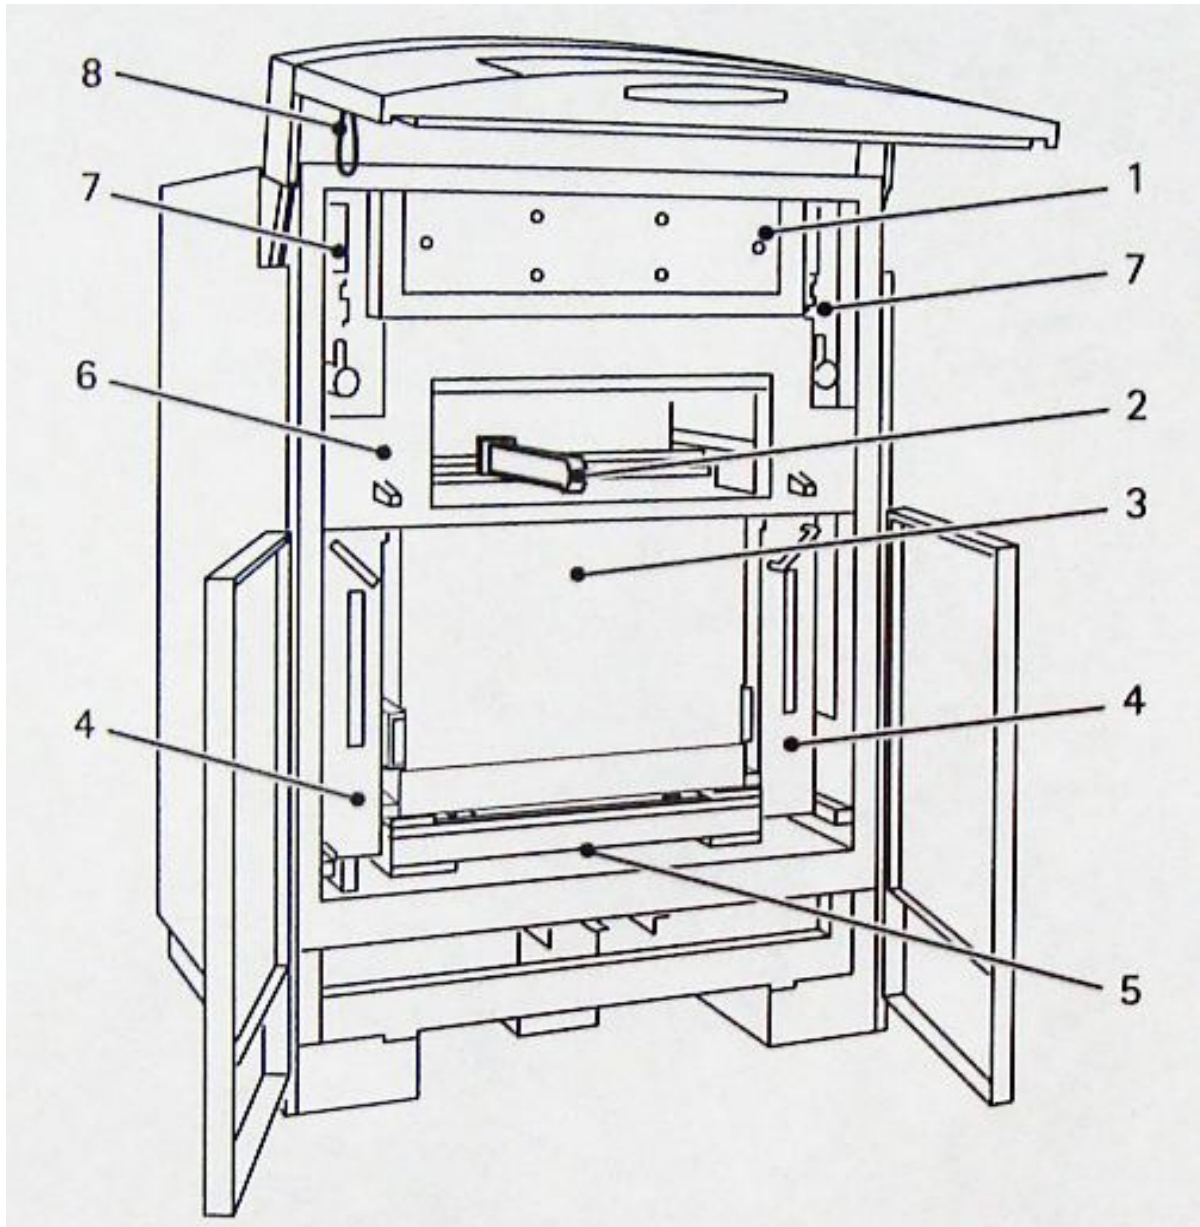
Front view of the EOSINT P 800 system: 1 Optics chamber cover, 2 Recoater, 3 Exchangeable frame with building platform, 4 Collector bin, 5 Exchangeable frame lifting system, 6 Process chamber, 7 Dispenser, 8 Rubber strap [118]
